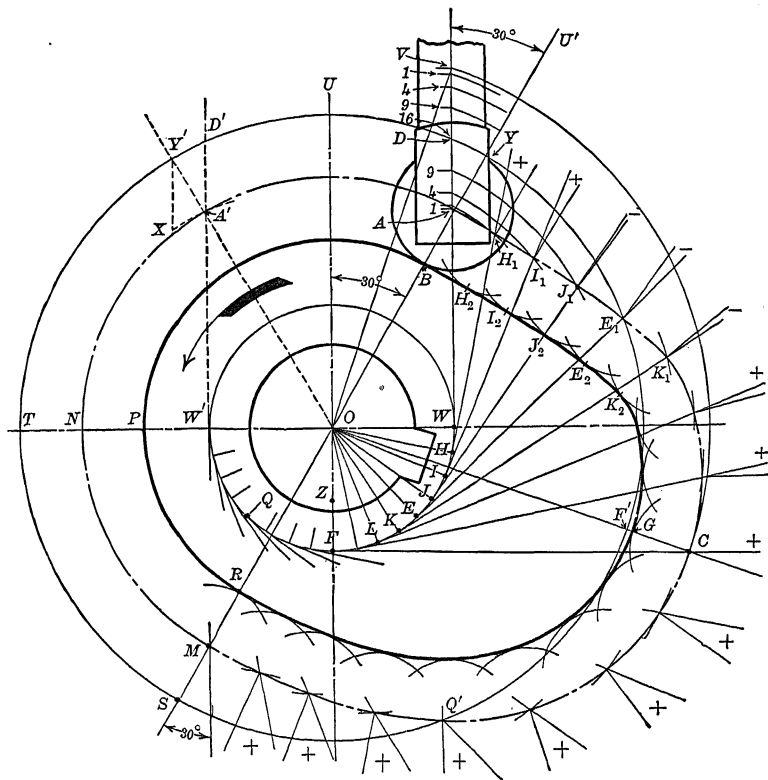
PROBLEM 6, CAM WITH OFFSET ROLLER FOLLOWER
